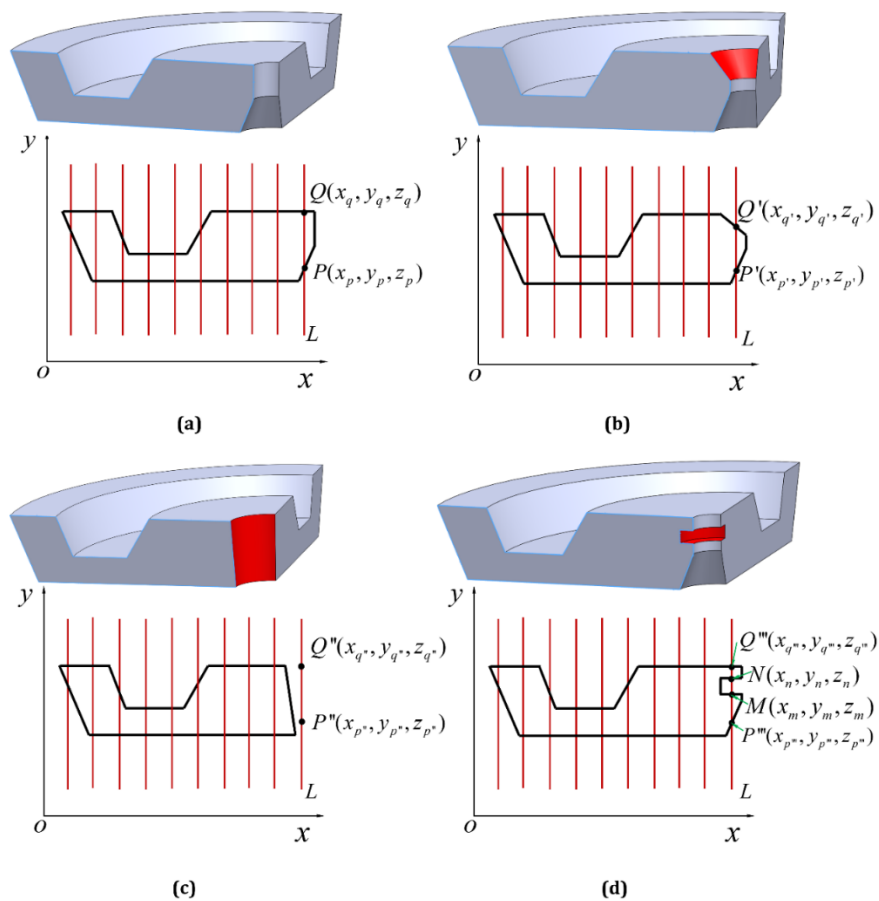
Damage extraction. (a) Intersections of casting rays with the nominal model; Intersections of casting rays with the damaged model with hole boundary fracture (b), inner hole penetrating fracture (c) and inner hole inside fracture (d)
